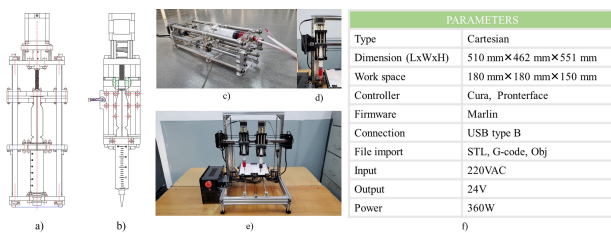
Indirect extrusion (a and c), direct extrusion (b and d), 3D printing machine (e), and parameter of a 3D printing machine (f) (Nguyen et al., 2024).
